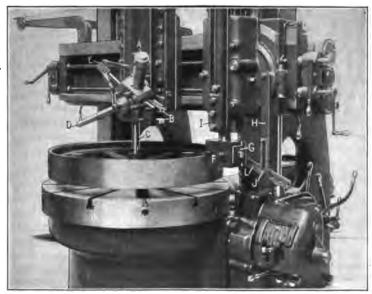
Gisholt Mill equipped with Convex Turning Attachment
